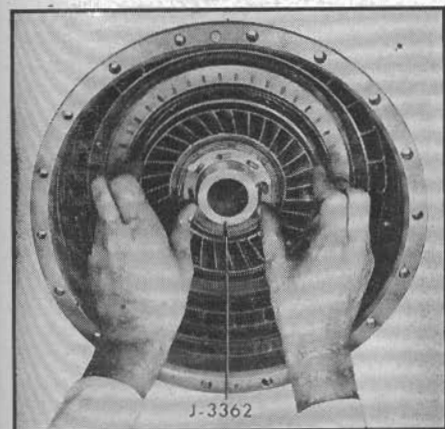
Installing secondary pump to primary pump hub. 1950-52
